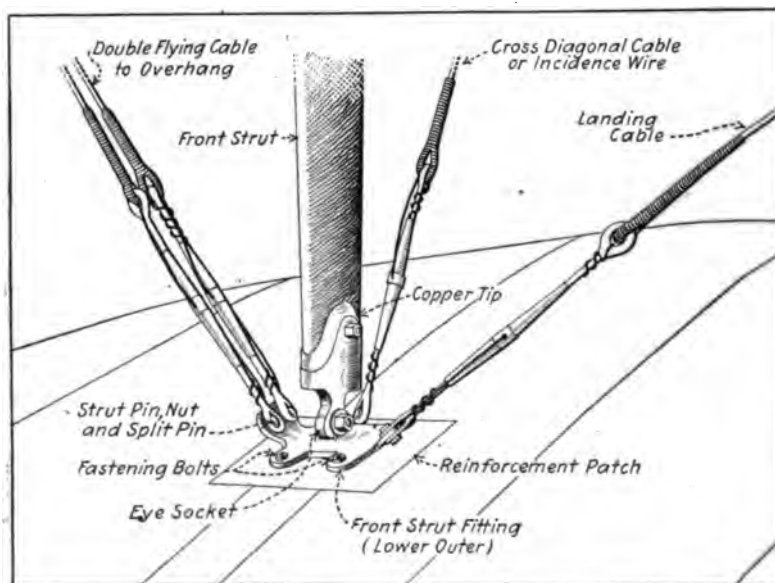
Lower End of Interplane Strut Showing Wing Fittings, and Turn-buckles and Clevises at Fitting End of Flying and Landing Wires.
